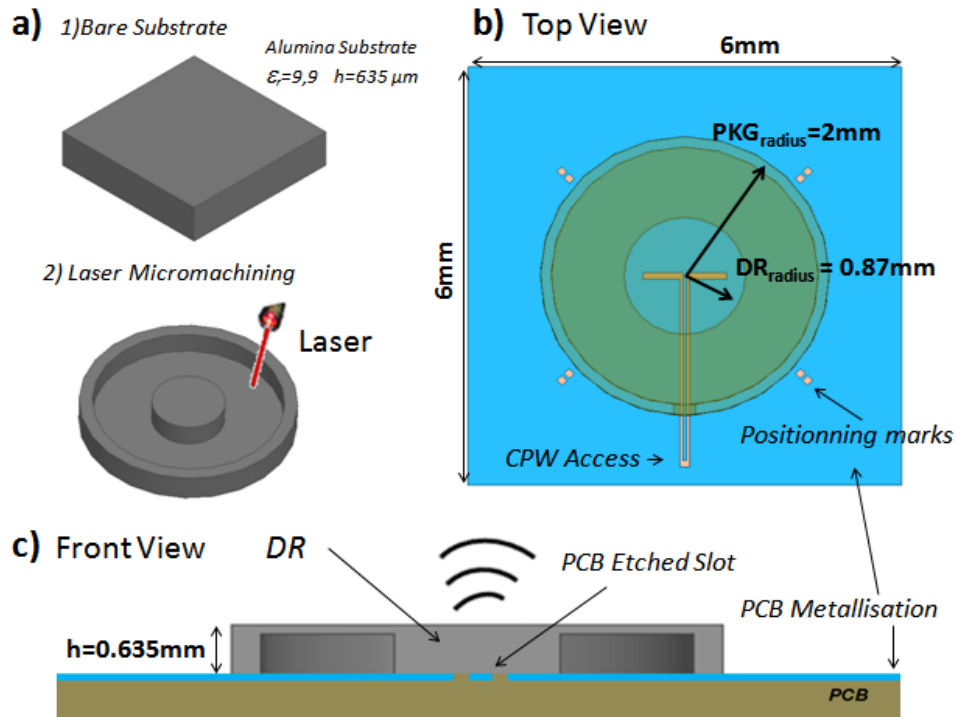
a) Micromachining process b) Top view of Package and PCB etched slot c) Front view for PCB and Antenna Integration
